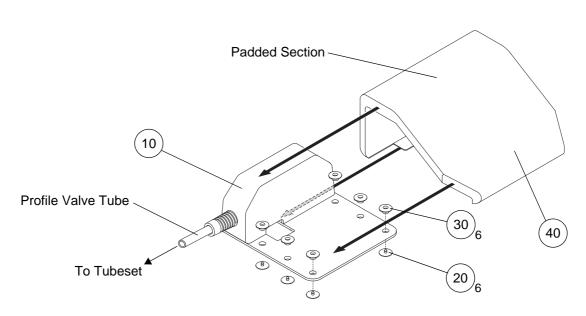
Installing Protection Pad over Profile Valve Main Assembly
